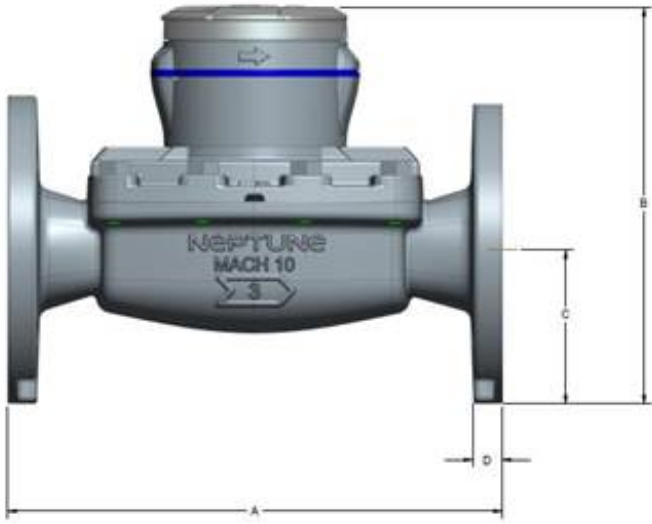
Commercial and Industrial Meter Dimensions – Side View
